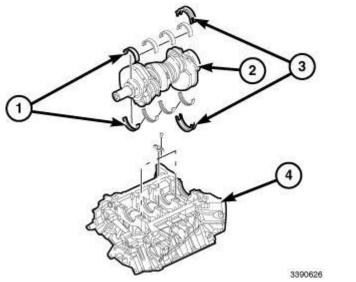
Crankshaft, Bearings, Thrust Bearing & Engine Block Courtesy of CHRYSLER GROUP, LLC
